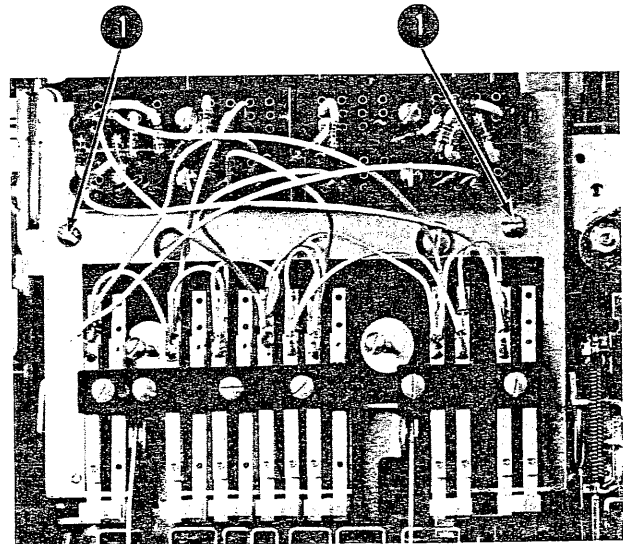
Rotate-Spring Replacement (Steps 1-4)
